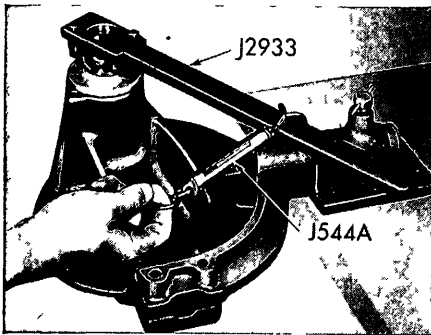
Measuring pinion bearing preload with a spring scale, 1947-52
